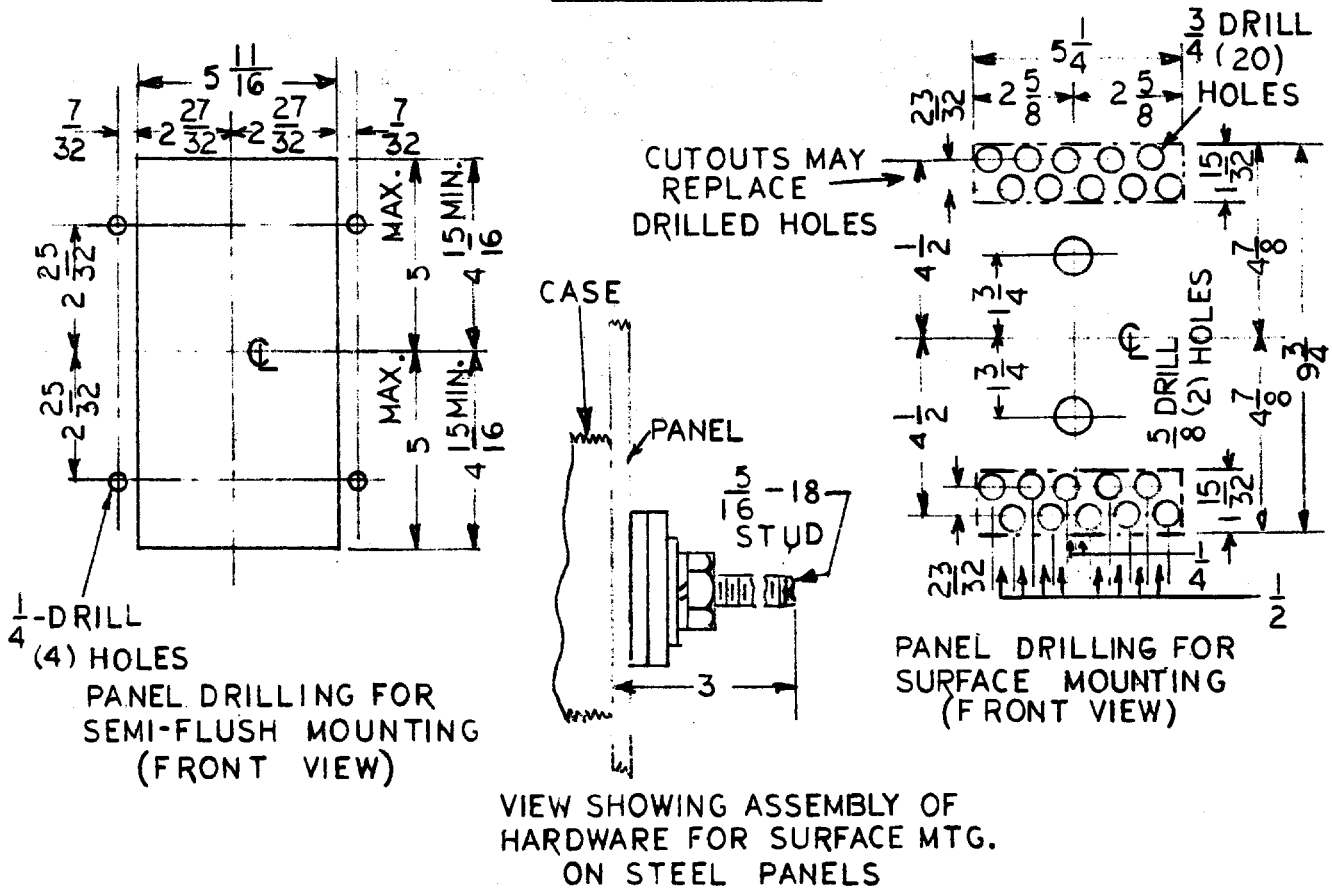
(K-6209272-2) OUTLINE AND PANEL DRILLING DIMENSIONS FOR NAA99AE RELAY
